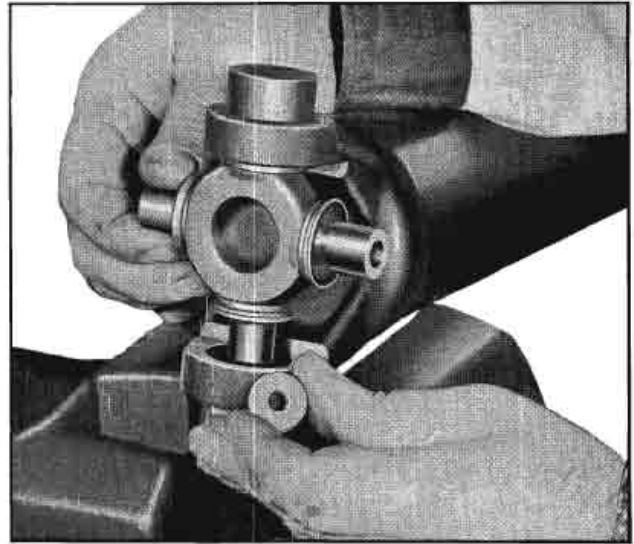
A-8 Placing Washers Inside Bearing of Fixed Yoke Member
